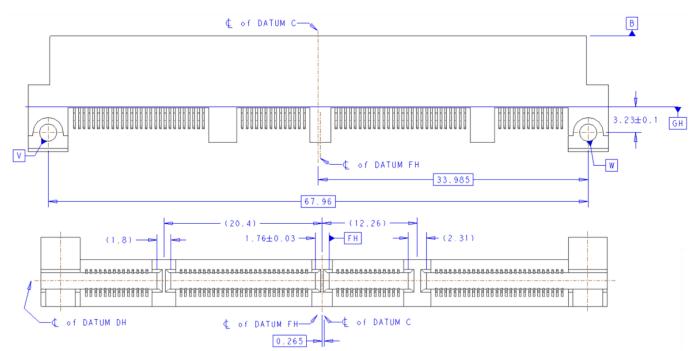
4C+ STRADDLE MOUNT CONNECTOR DIMENSIONS - REAR VIEW (MM)
